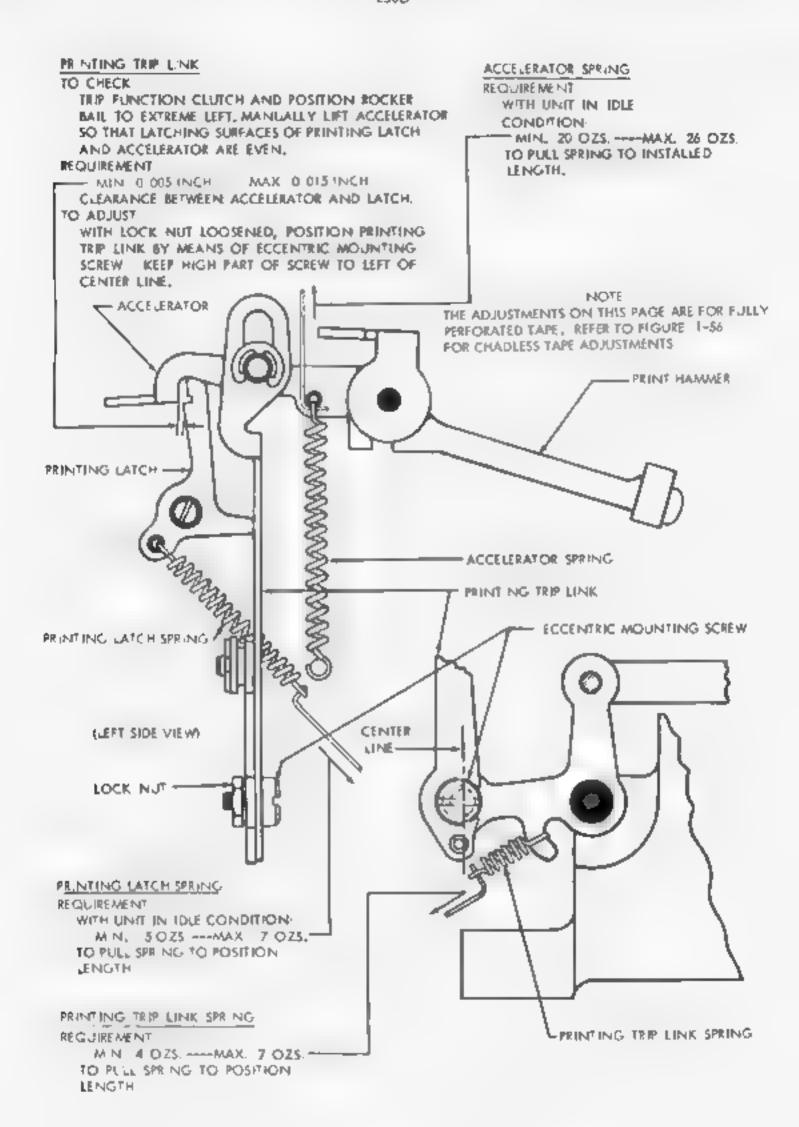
PRINTING MECHANISM FOR FULLY PERFORATED TAPE
